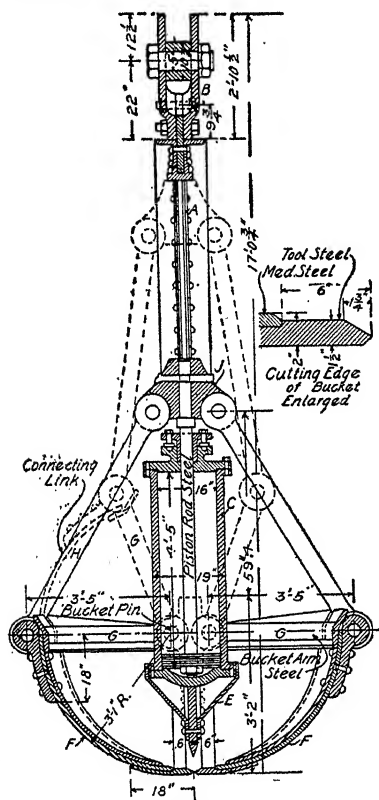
Vertical Section of Pneumatic Clamshell Bucket
